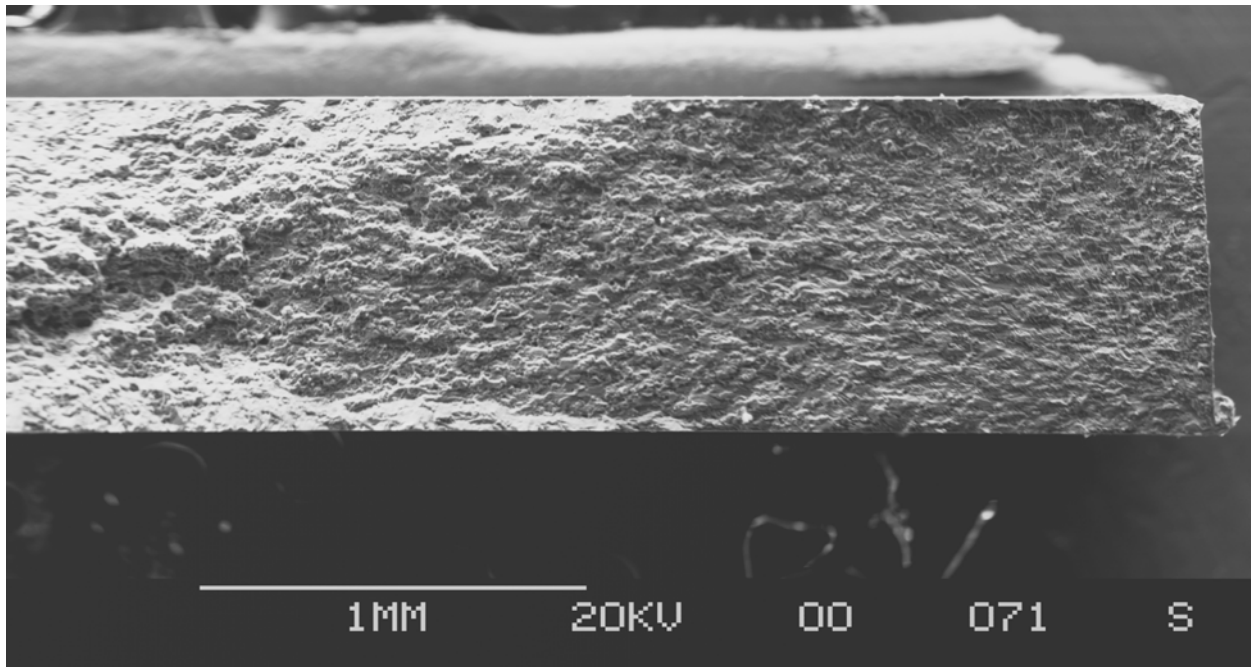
Fatigue Crack on Fracture Surface of Specimen 5871.
